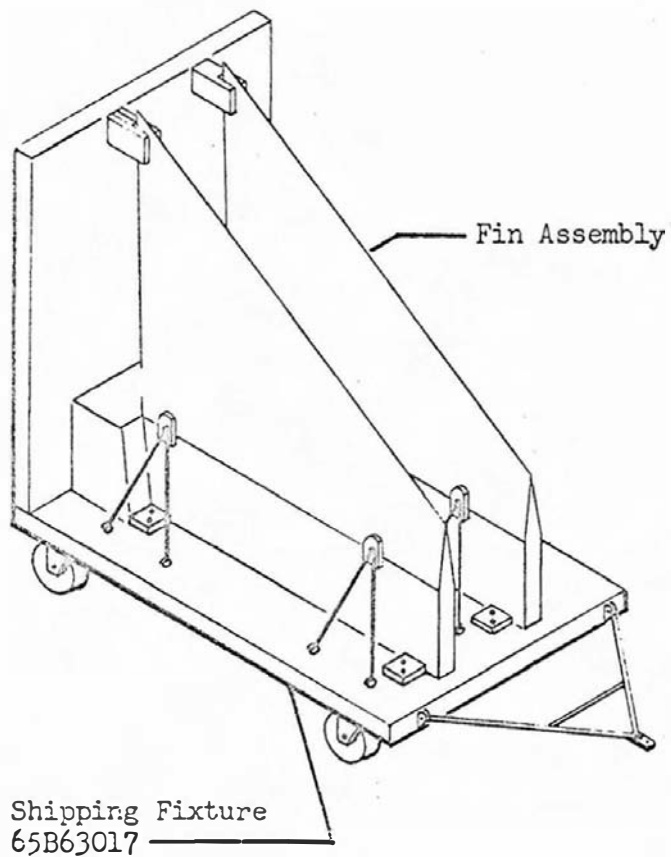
21. Shipping Fixture 65B63017 for Fin Assembly
